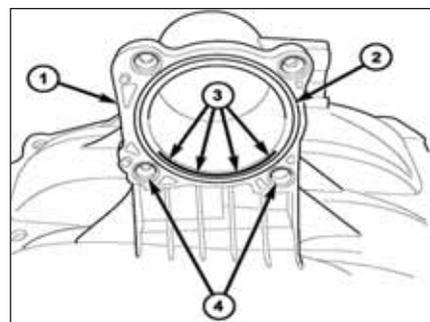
Apply RTV to the lower section of the joint between the lower two throttle body bolt attachment holes.
